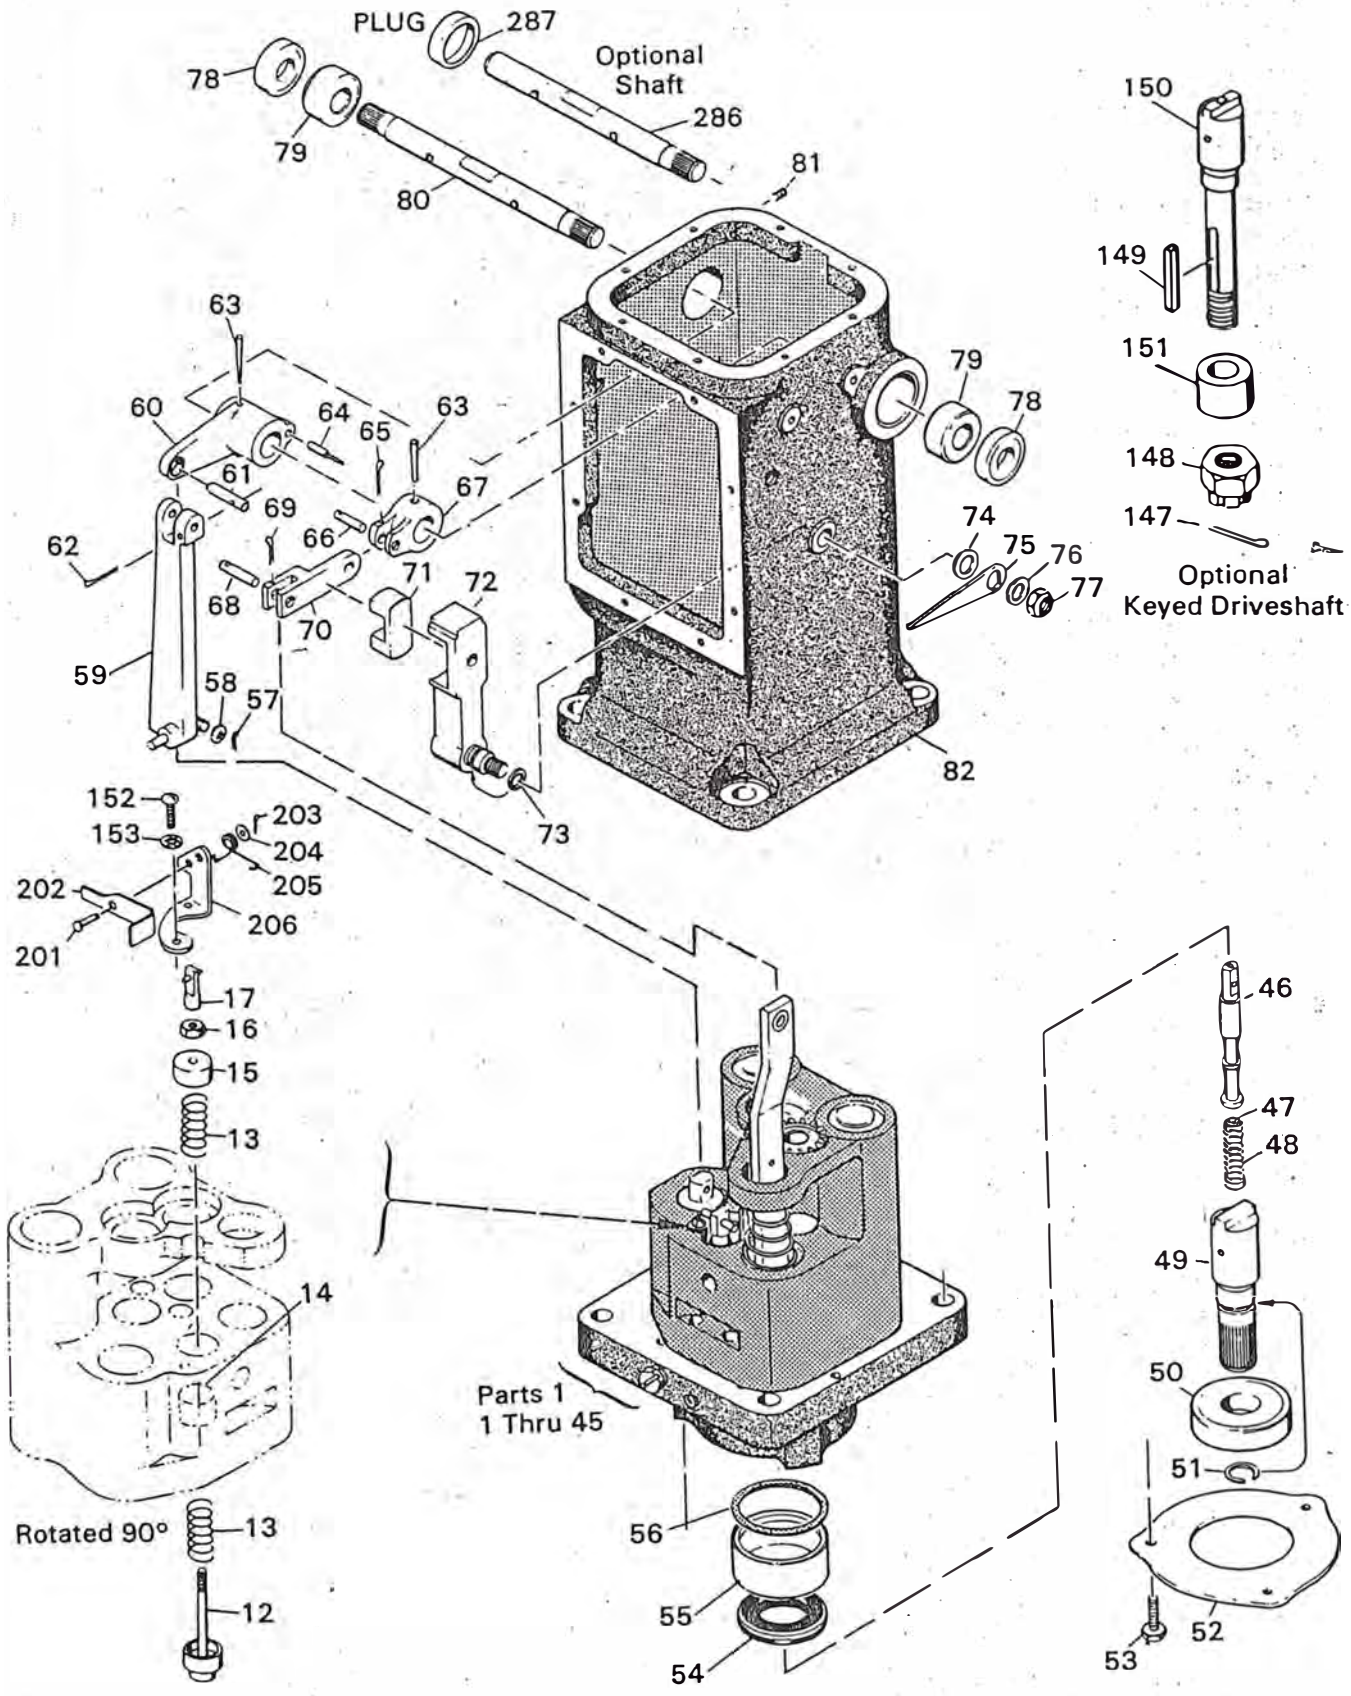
Exploded View of UG8 Dial Governor (Sheet 2 of 4)
